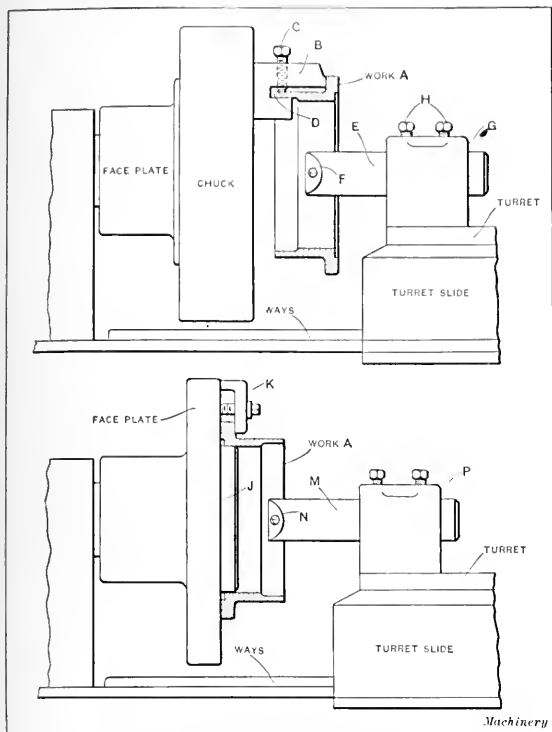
Thin Flanged Collar machined on a Pratt & Whitney Turntable Lathe
